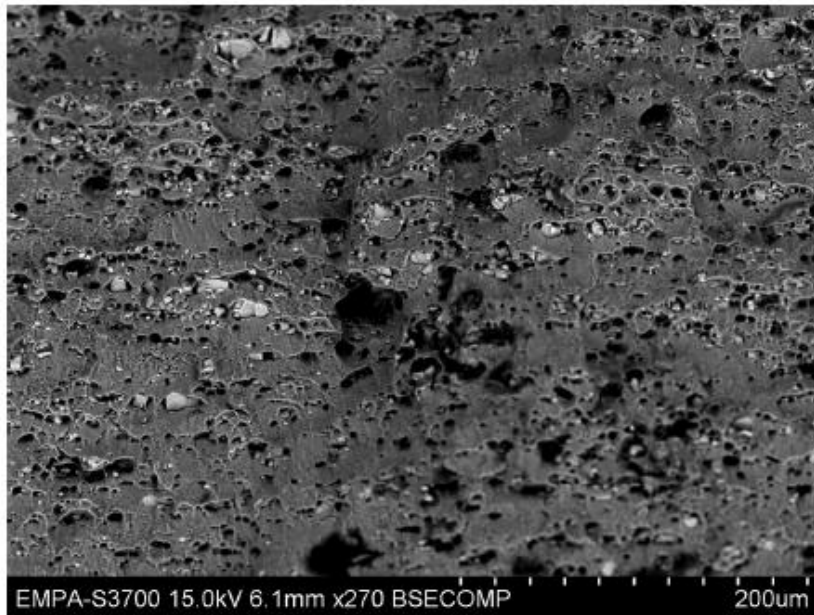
Detailed view of Figure 9 at higher magnification – a dimple fracture can be observed (ductile overload fracture)
